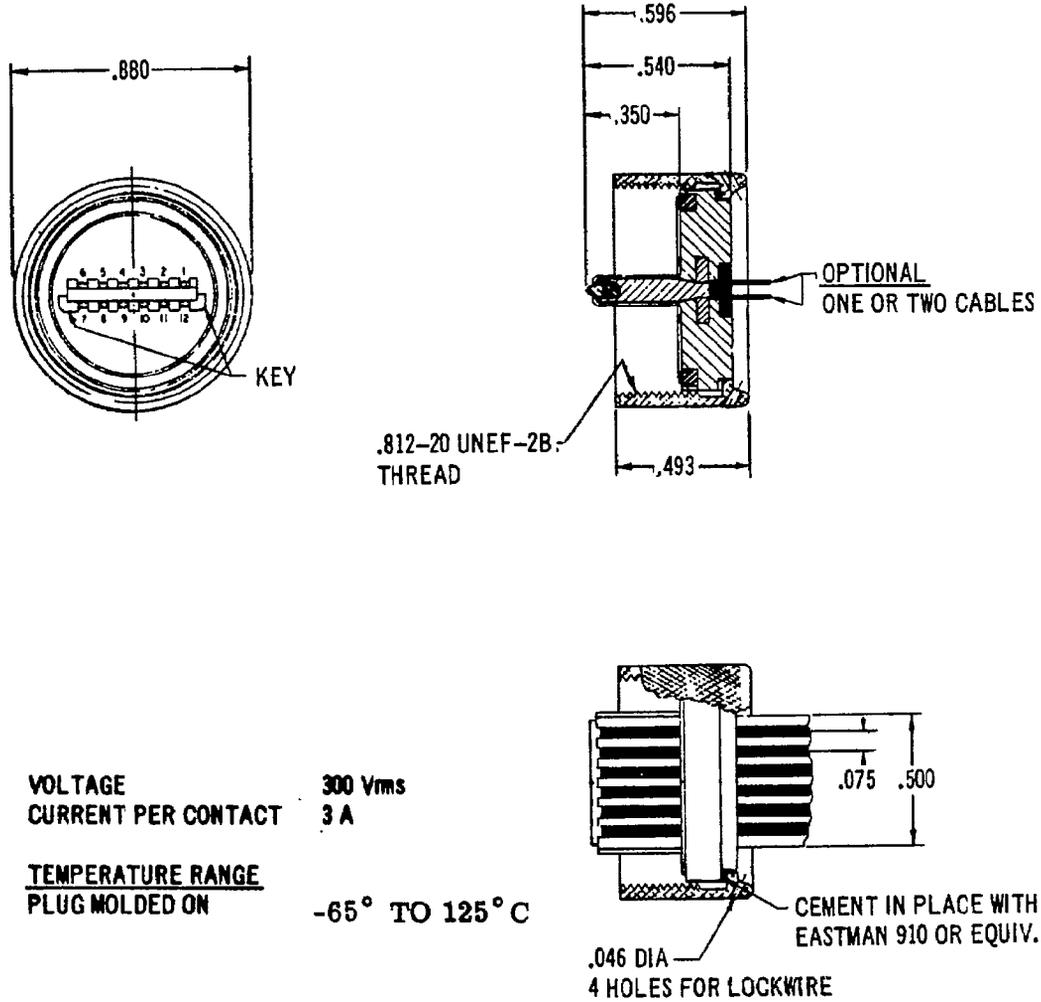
MIL-C-55544/9 Molded-on cylindrical plug assembly, 0.5-inch wide cable.
